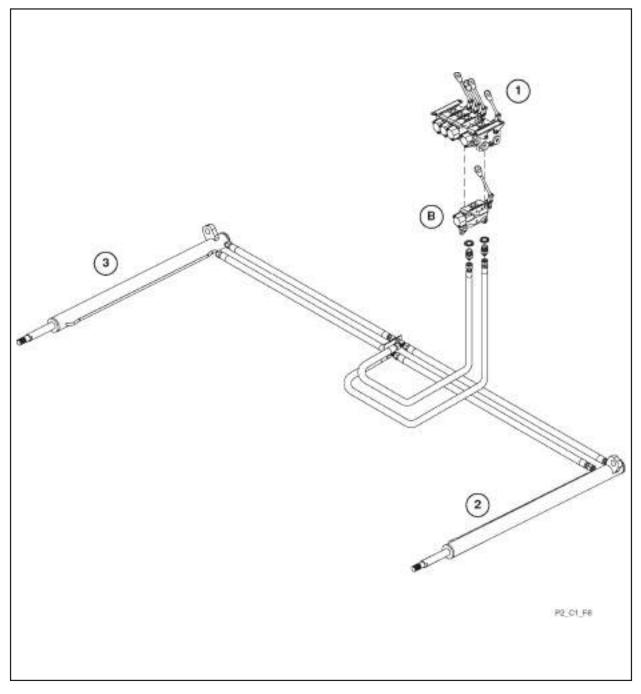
CARRIAGE CIRCUIT COMPONENT LAYOUT
